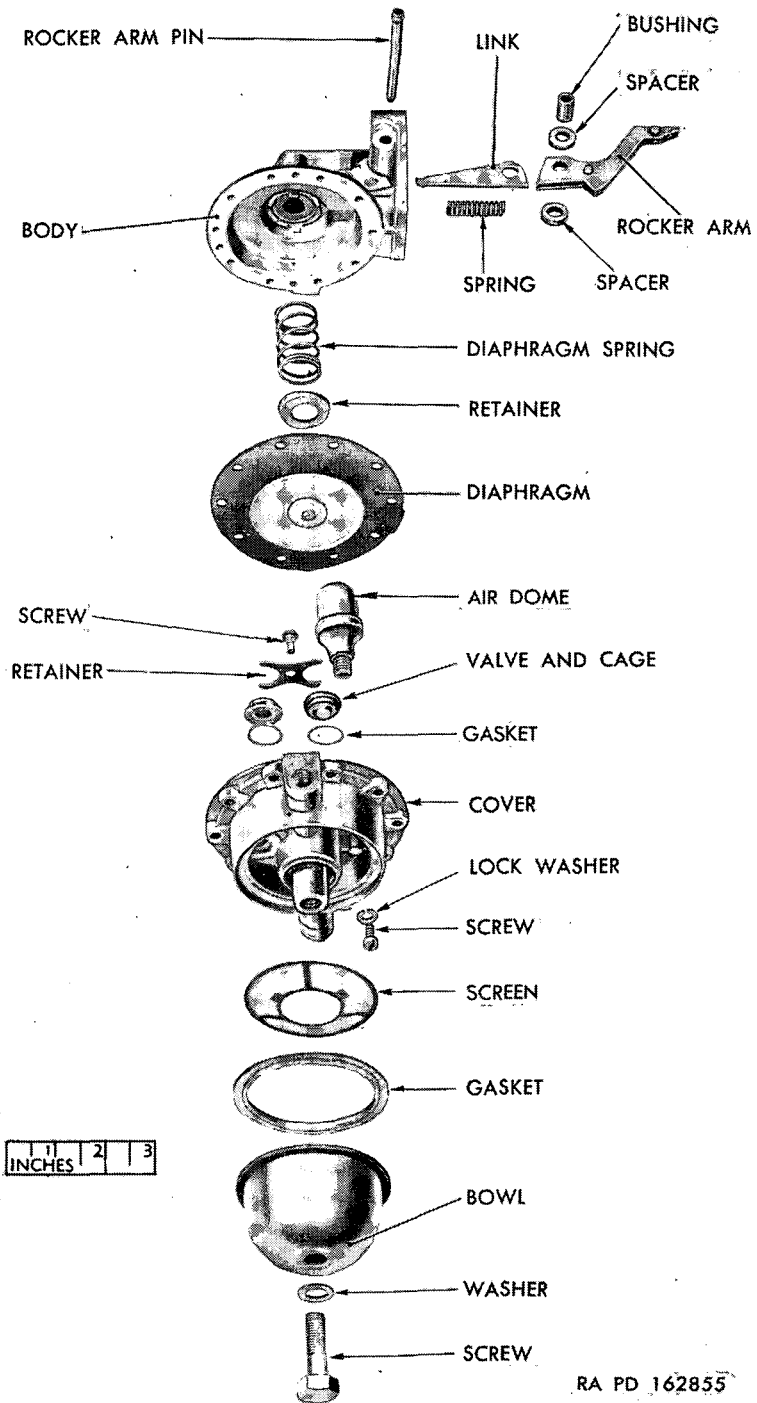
Fuel pump—disassembled (typical series AH and AW construction).
